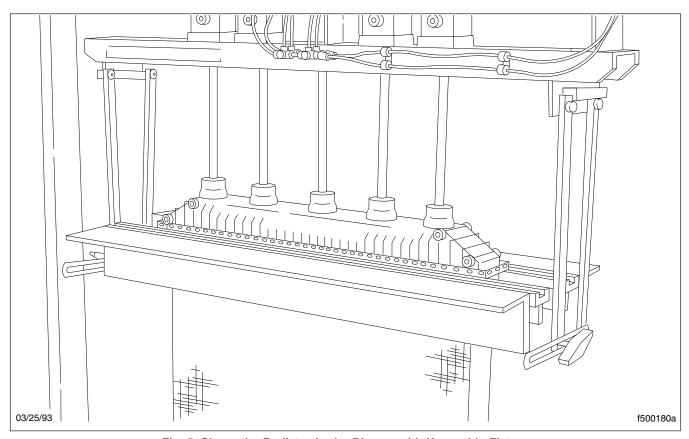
, Clamp the Radiator in the Disassembly/Assembly Fixture
